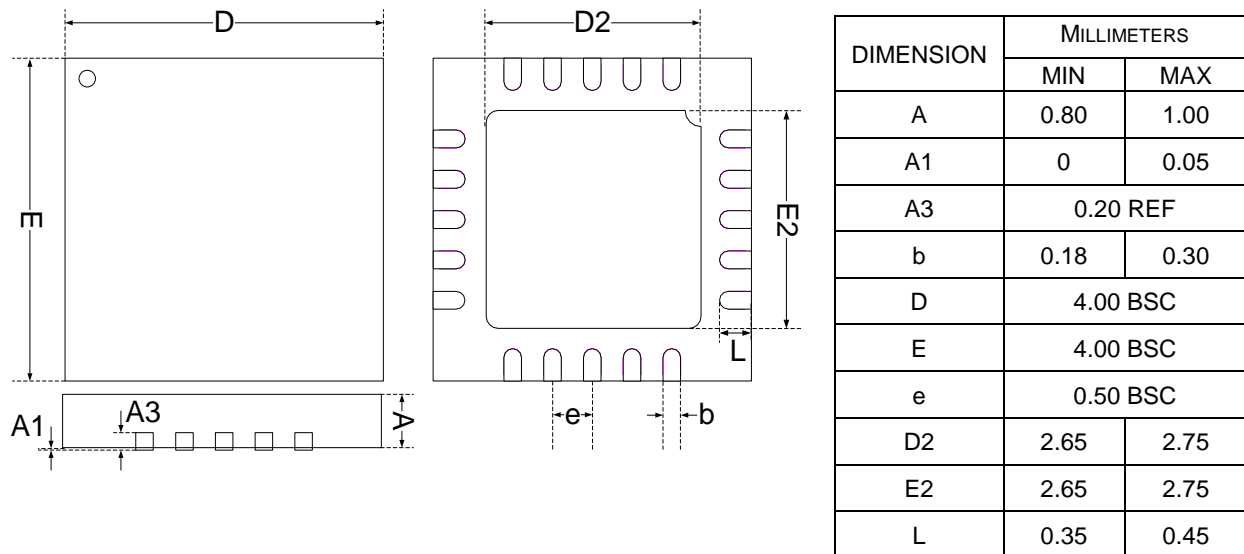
• 20L Plastic QFN 4x4mm Exposed Pad Package Dimensions
